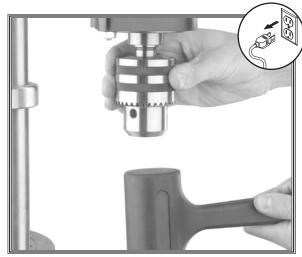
Seating arbor into spindle (chuck guard removed for clarity).
